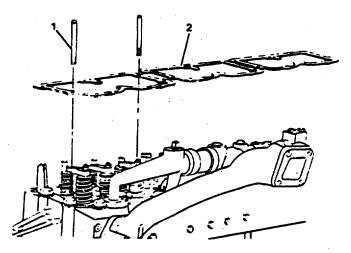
Rocker Housing Gaskets and Guide Studs.
